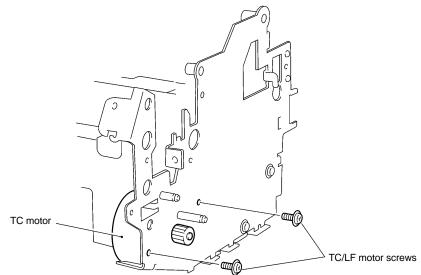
Reassembling the Right Side of the Chassis (1)
